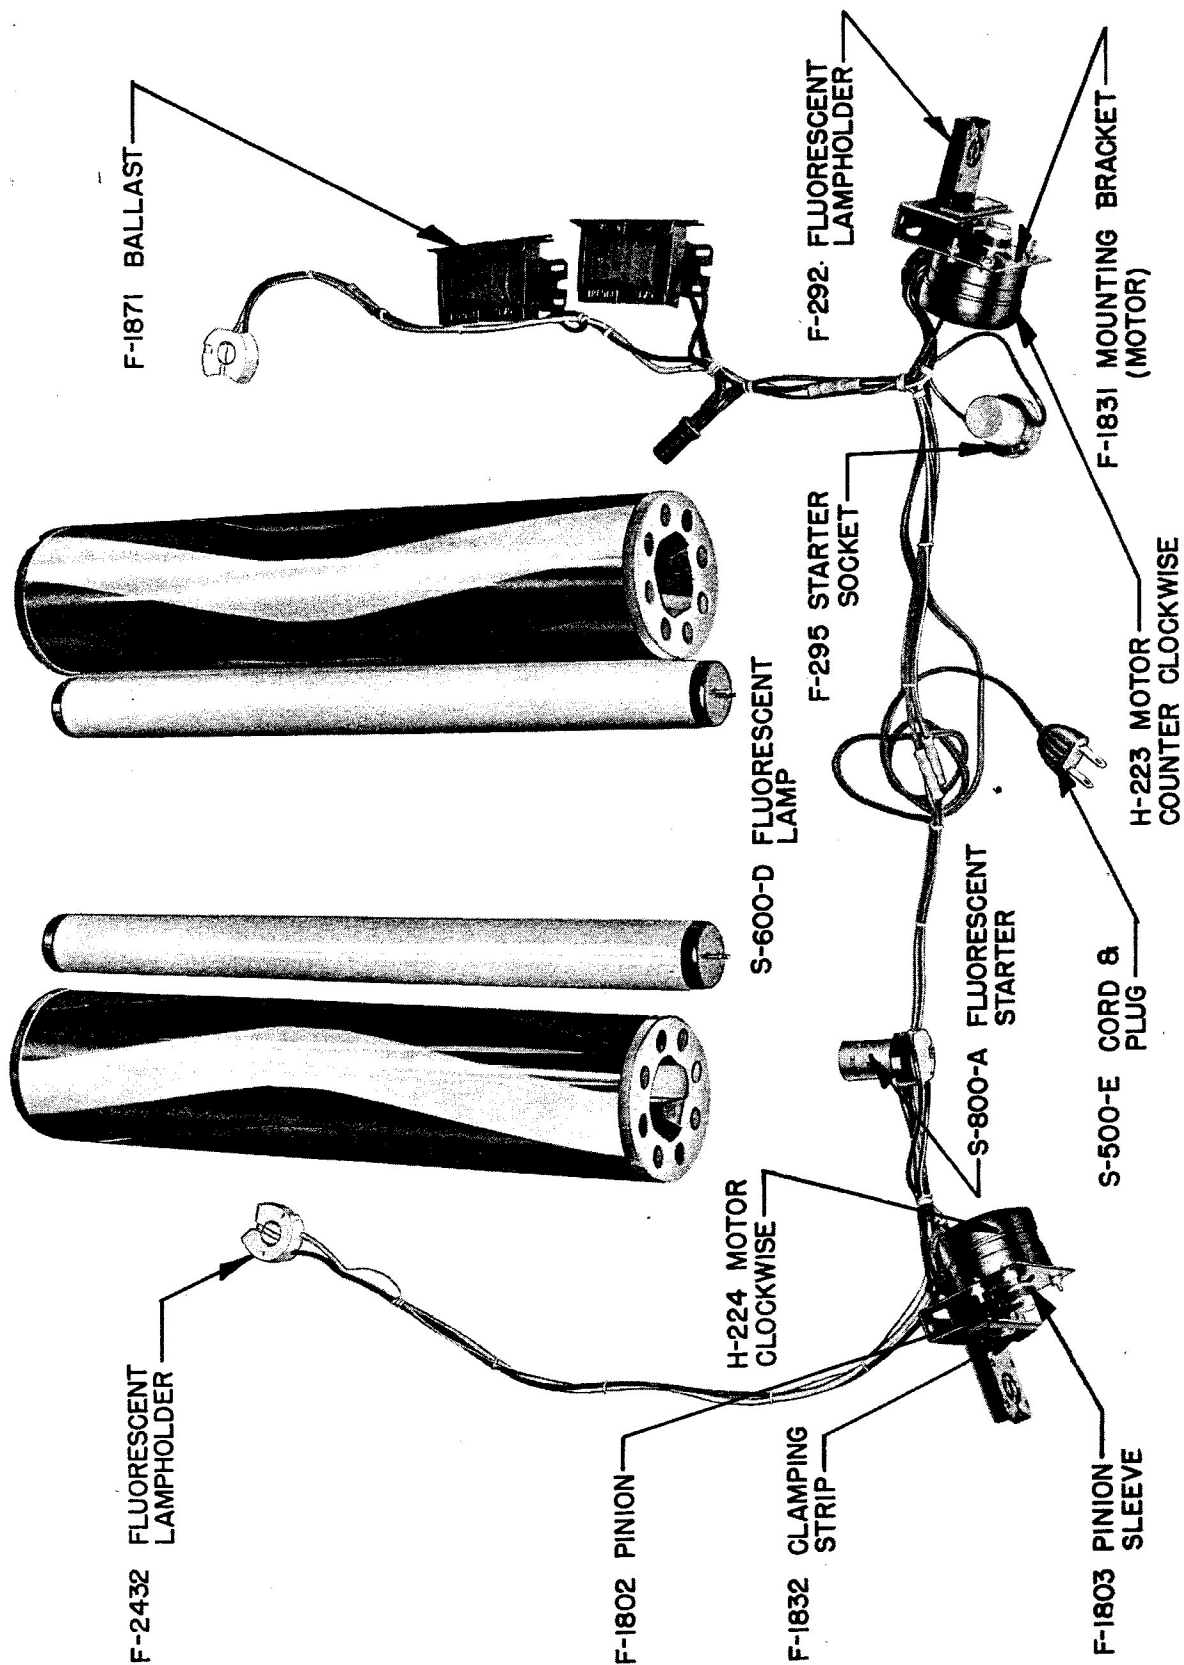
LOWER COLOR LIGHT ASSEMBLY
